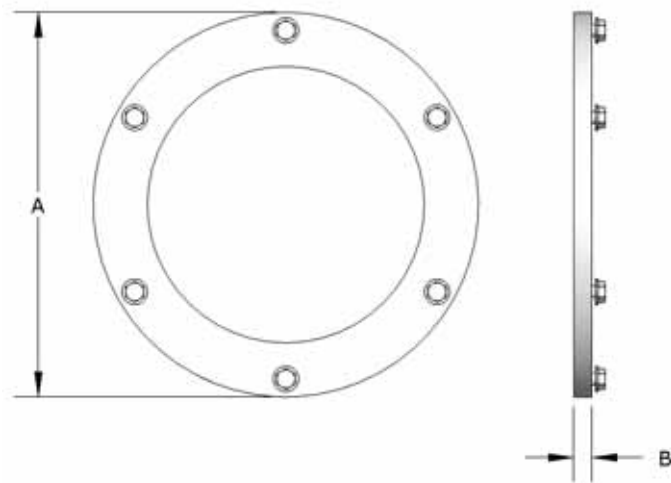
DCS-50S and DCS-68 Deck Mount Flange Dimensions
